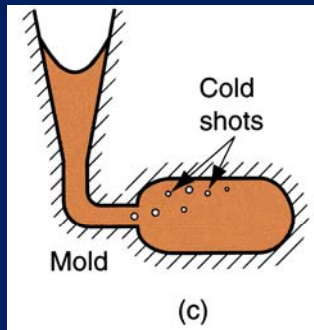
Some common defects in castings: (c) cold shot
